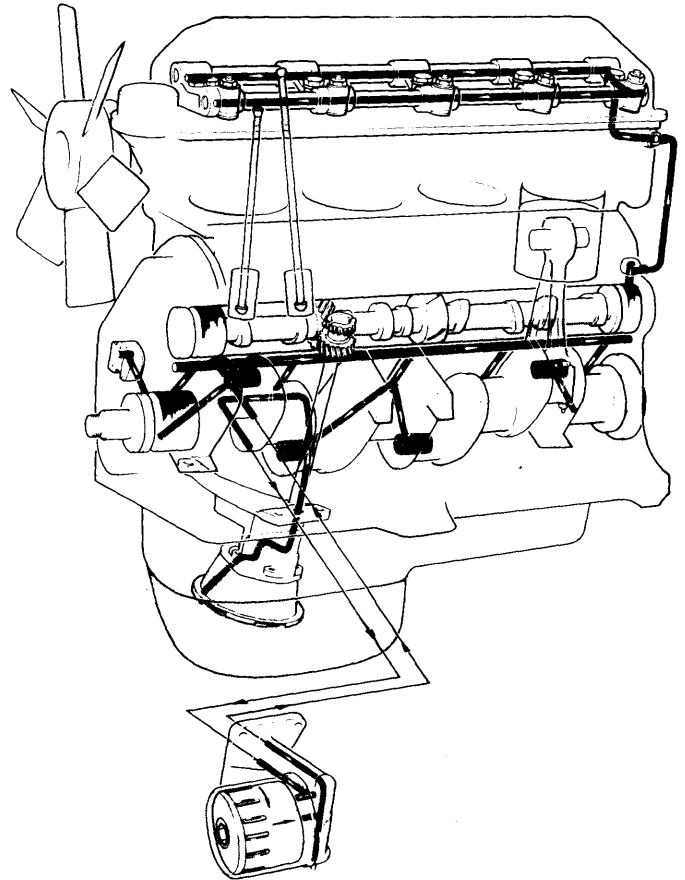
Sectional View of Peugeot Engine Oiling Circuit with Detail of Components Lubricated
